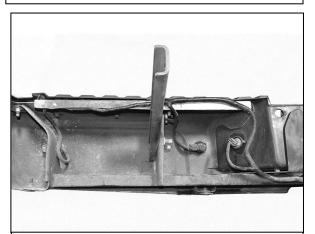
Models without parking sensors, push Plugs into sensor mounts on back of Bumper
